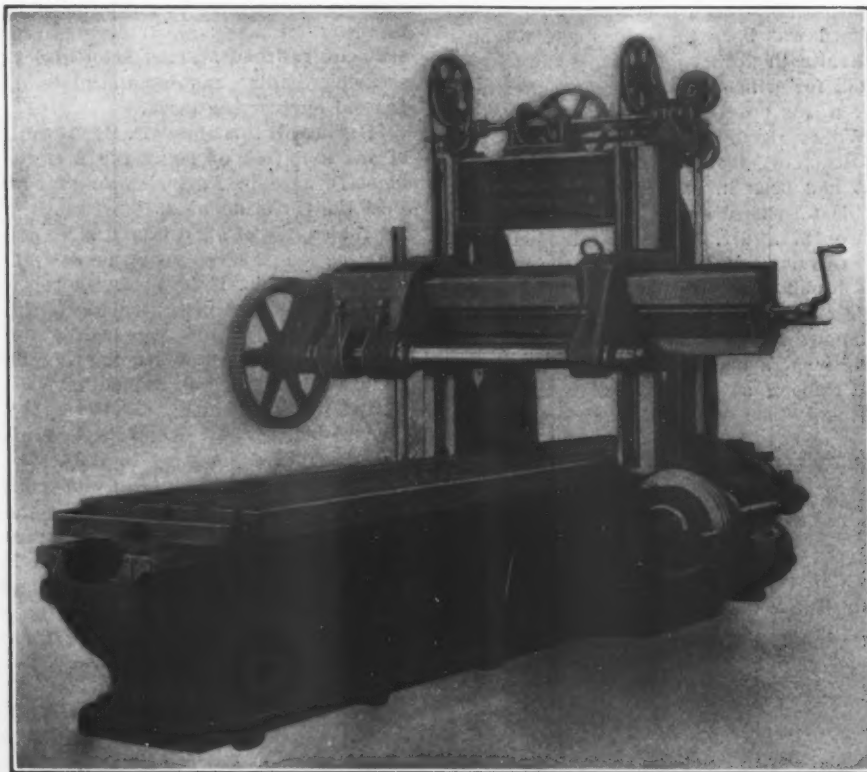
The 24 x 24 In. by 10 Ft. Horizontal Ingersoll Milling Machine Used for the First and Second Operations.
